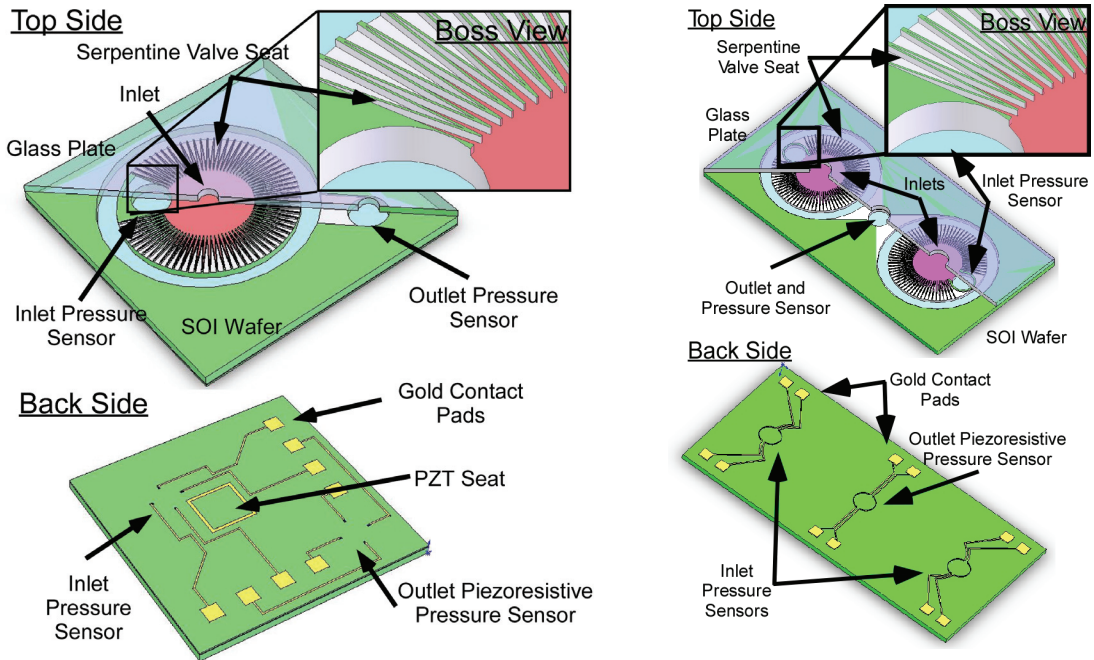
Starburst manifold concepts: (left) A top and back side view of the SOI wafer with the centralized inlet, dual pressure sensors, and starburst valve seat arrangement. (b) A manifold designed with the starburst valve seat used to regulate flow from two inlets. The manifold has a common outlet with a single pressure sensor for mixing in the device and common flow control.
